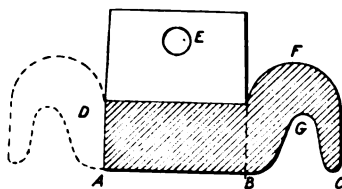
Working Drawing Cross-Section on x-y of Fig. 47.
